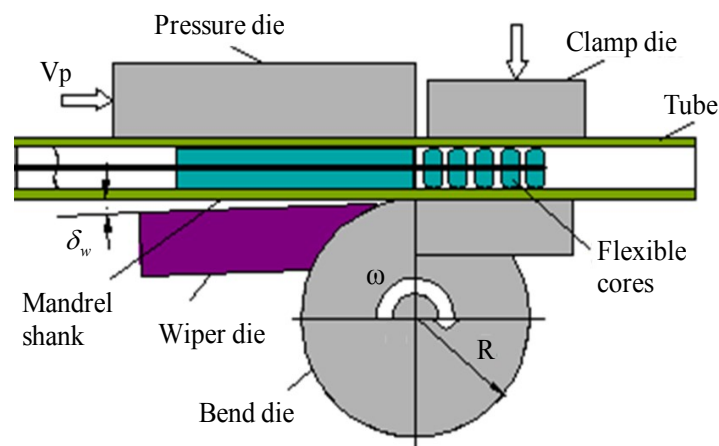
Tools setup and illustration of mandrel rotary draw bending process.
